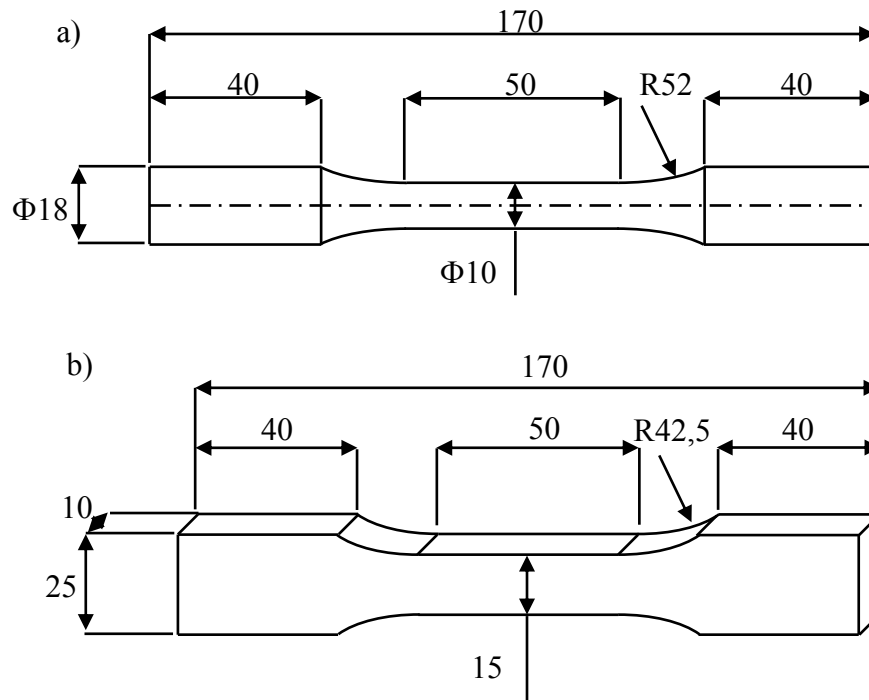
Fatigue specimens geometries. Dimensions in mm.
